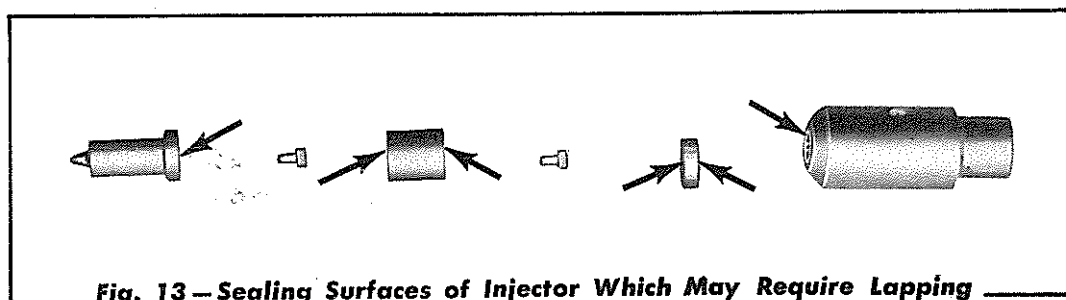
Sealing Surfaces of Injector Which May Require Lapping
